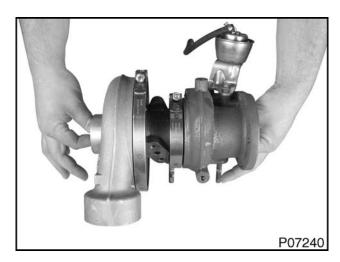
Free rotation of turbocharger assembly shaft (typical)
